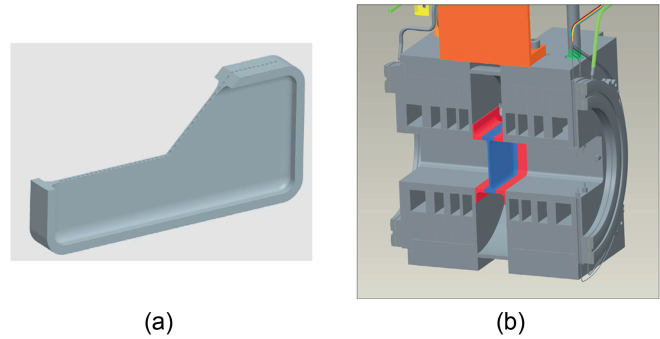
Second generation Al-6061-T651 PBW at the spallation neutron source: (a) sectional view of flat-plate aluminum window and (b) cross-sectional view of complete SNS proton beam window assembly [18].
